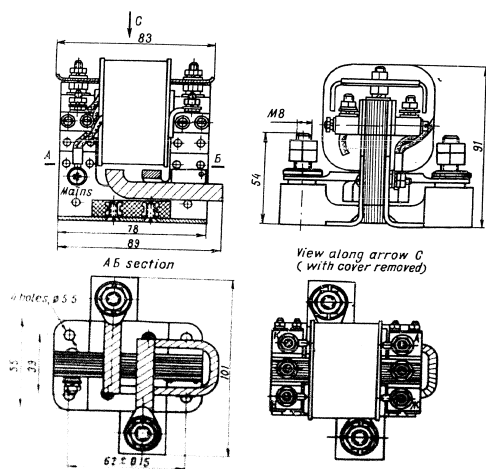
Overall and Installation Dimensions of TC-9AM Transformer
